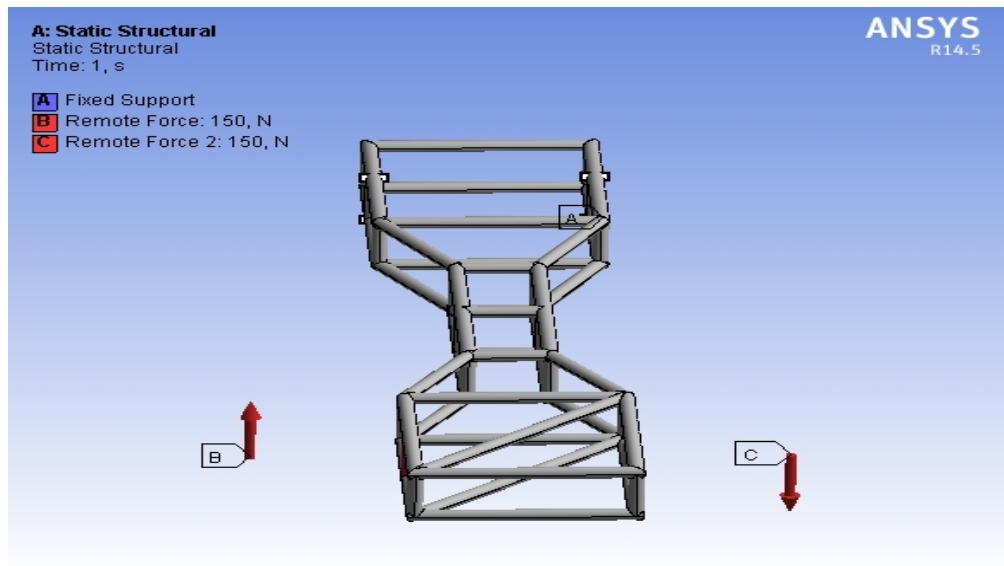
Torsional loading of the circular tube profiled backbone chassis
